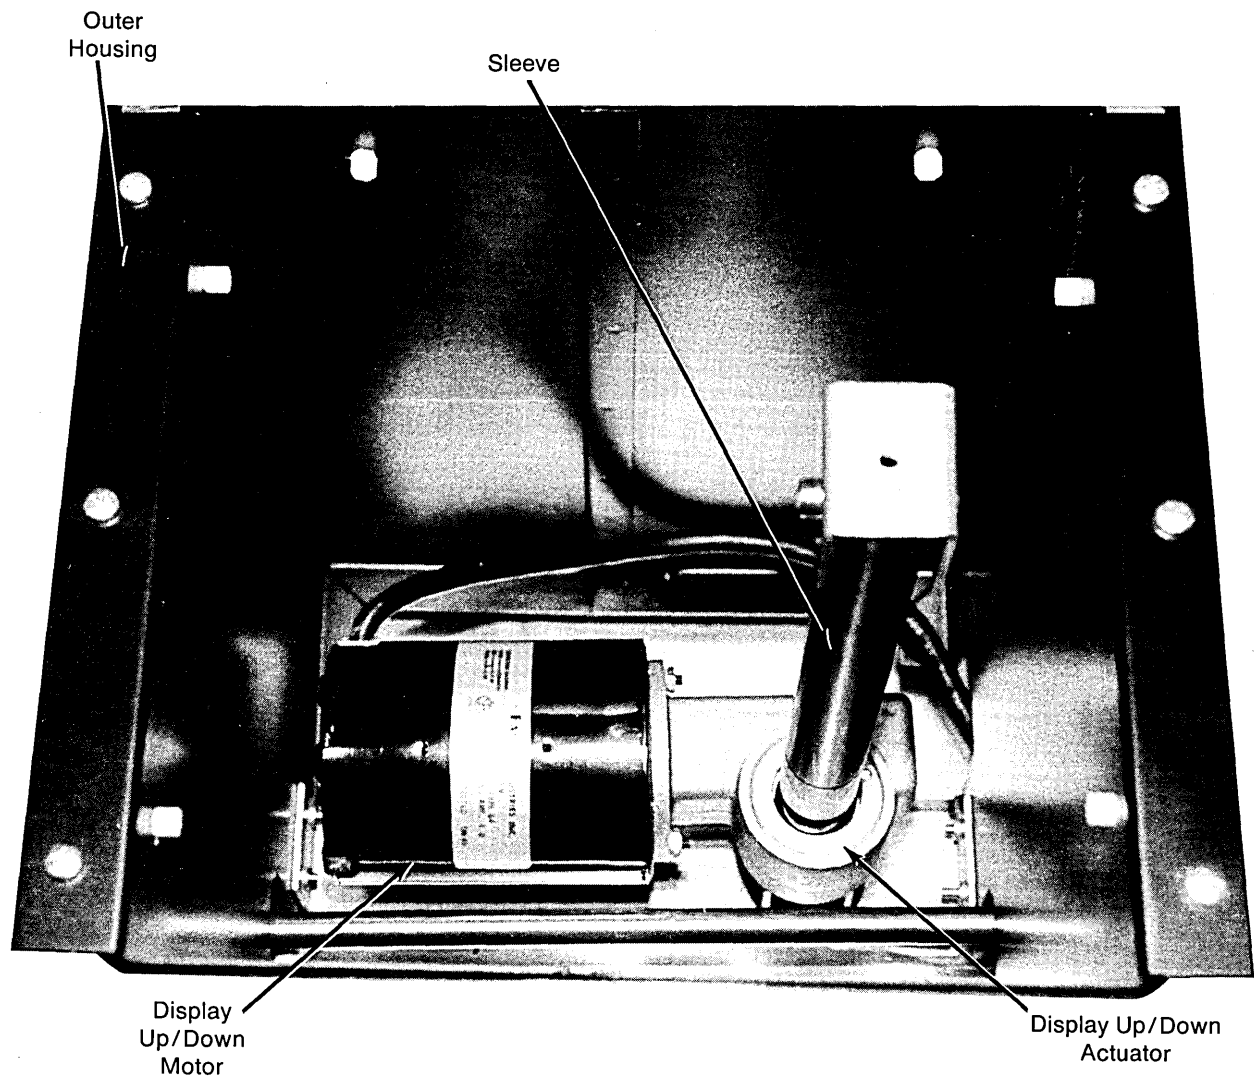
Outer Housing Interior with Inner Housing Removed
